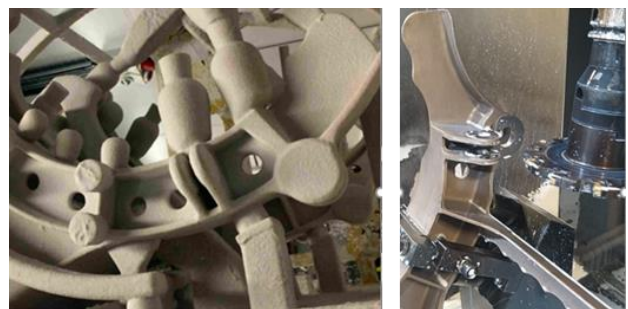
Cradle manufacturing by CTI (Casting Technology Institute); de-shelled cast cradle prior to riser removal and chemical milling on the left; machining of the main attachment features on the right.
